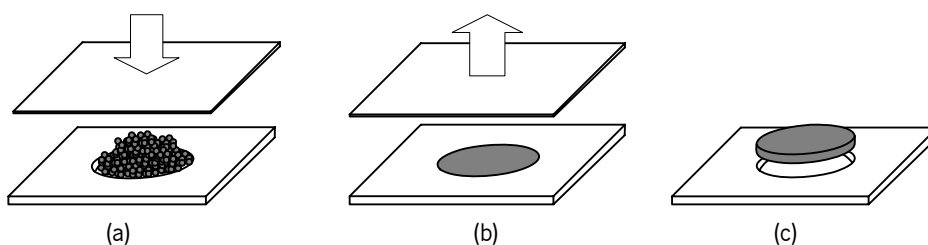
Schematic description of the steps of hot press moulding process: (a) granulate loading and pressing, (b) mould opening and (c) part extraction.
